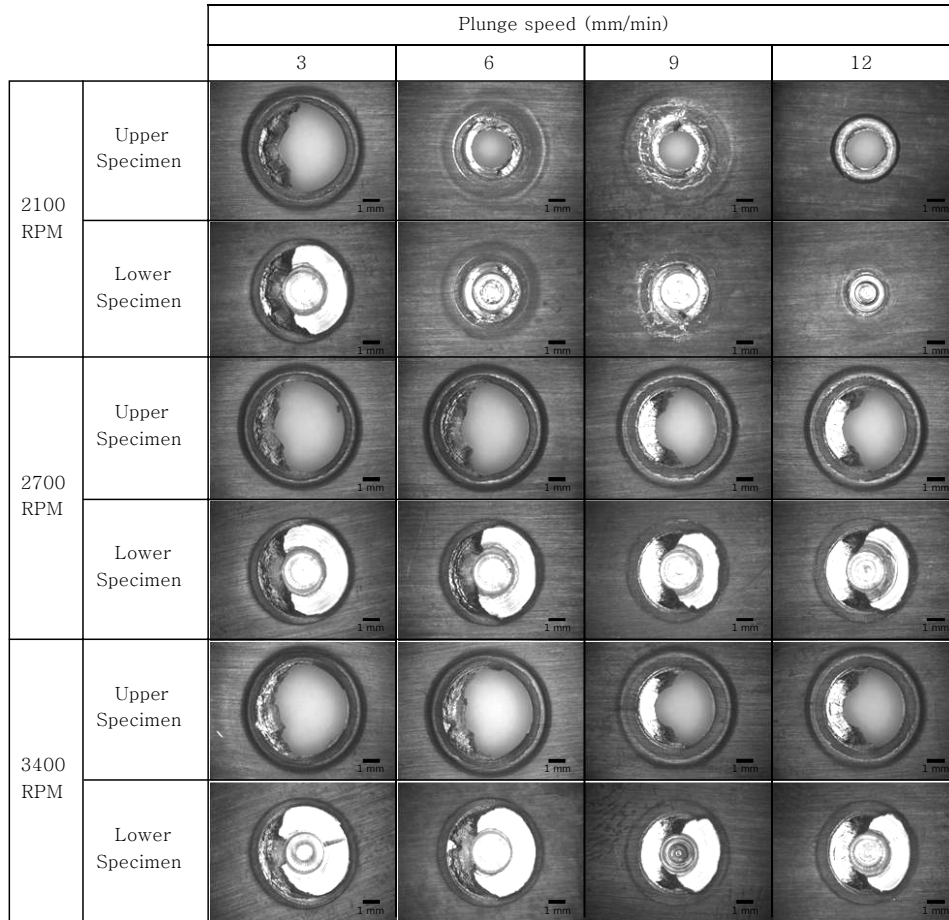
Appearances of fracture surface after tensile-shear test of FSSWed specimens at each rotation speed (rpm) of tool
